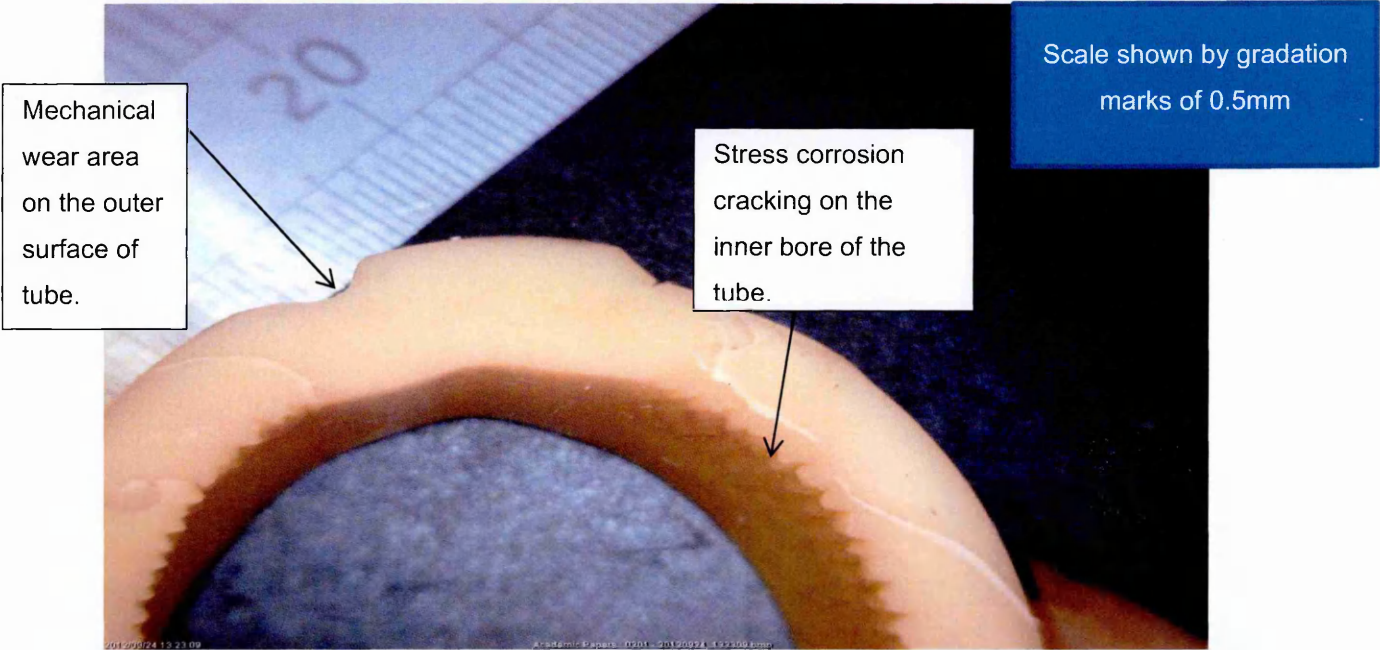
Combinational degradation: mechanical wear on the outer surface of an EPDM/PP blend tube which also shows signs of ESC on the inner bore.
